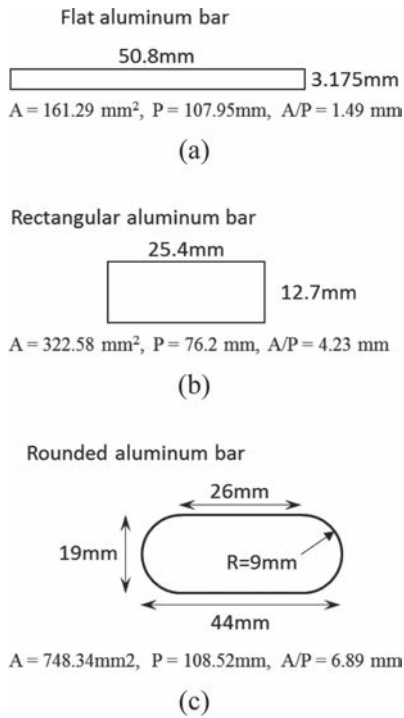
Cross-sectional shape and dimension of the heat exchanger.
